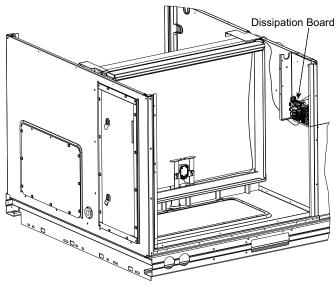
Location of Dissipation Control Board (shown with dust cover removed)
